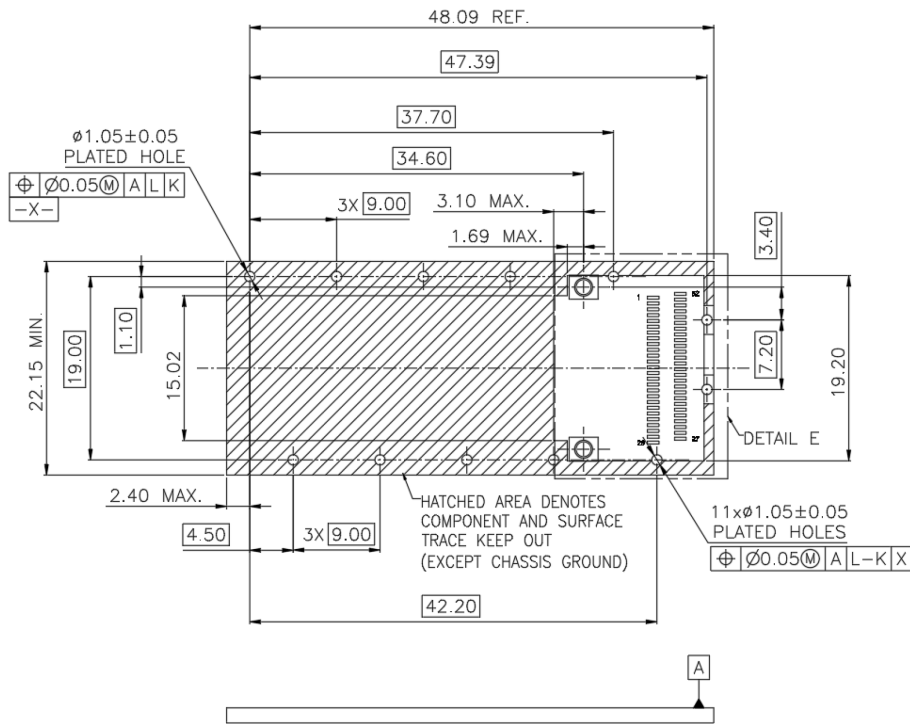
QSFP112 1x1 SMT Connector and cage PCB layout
